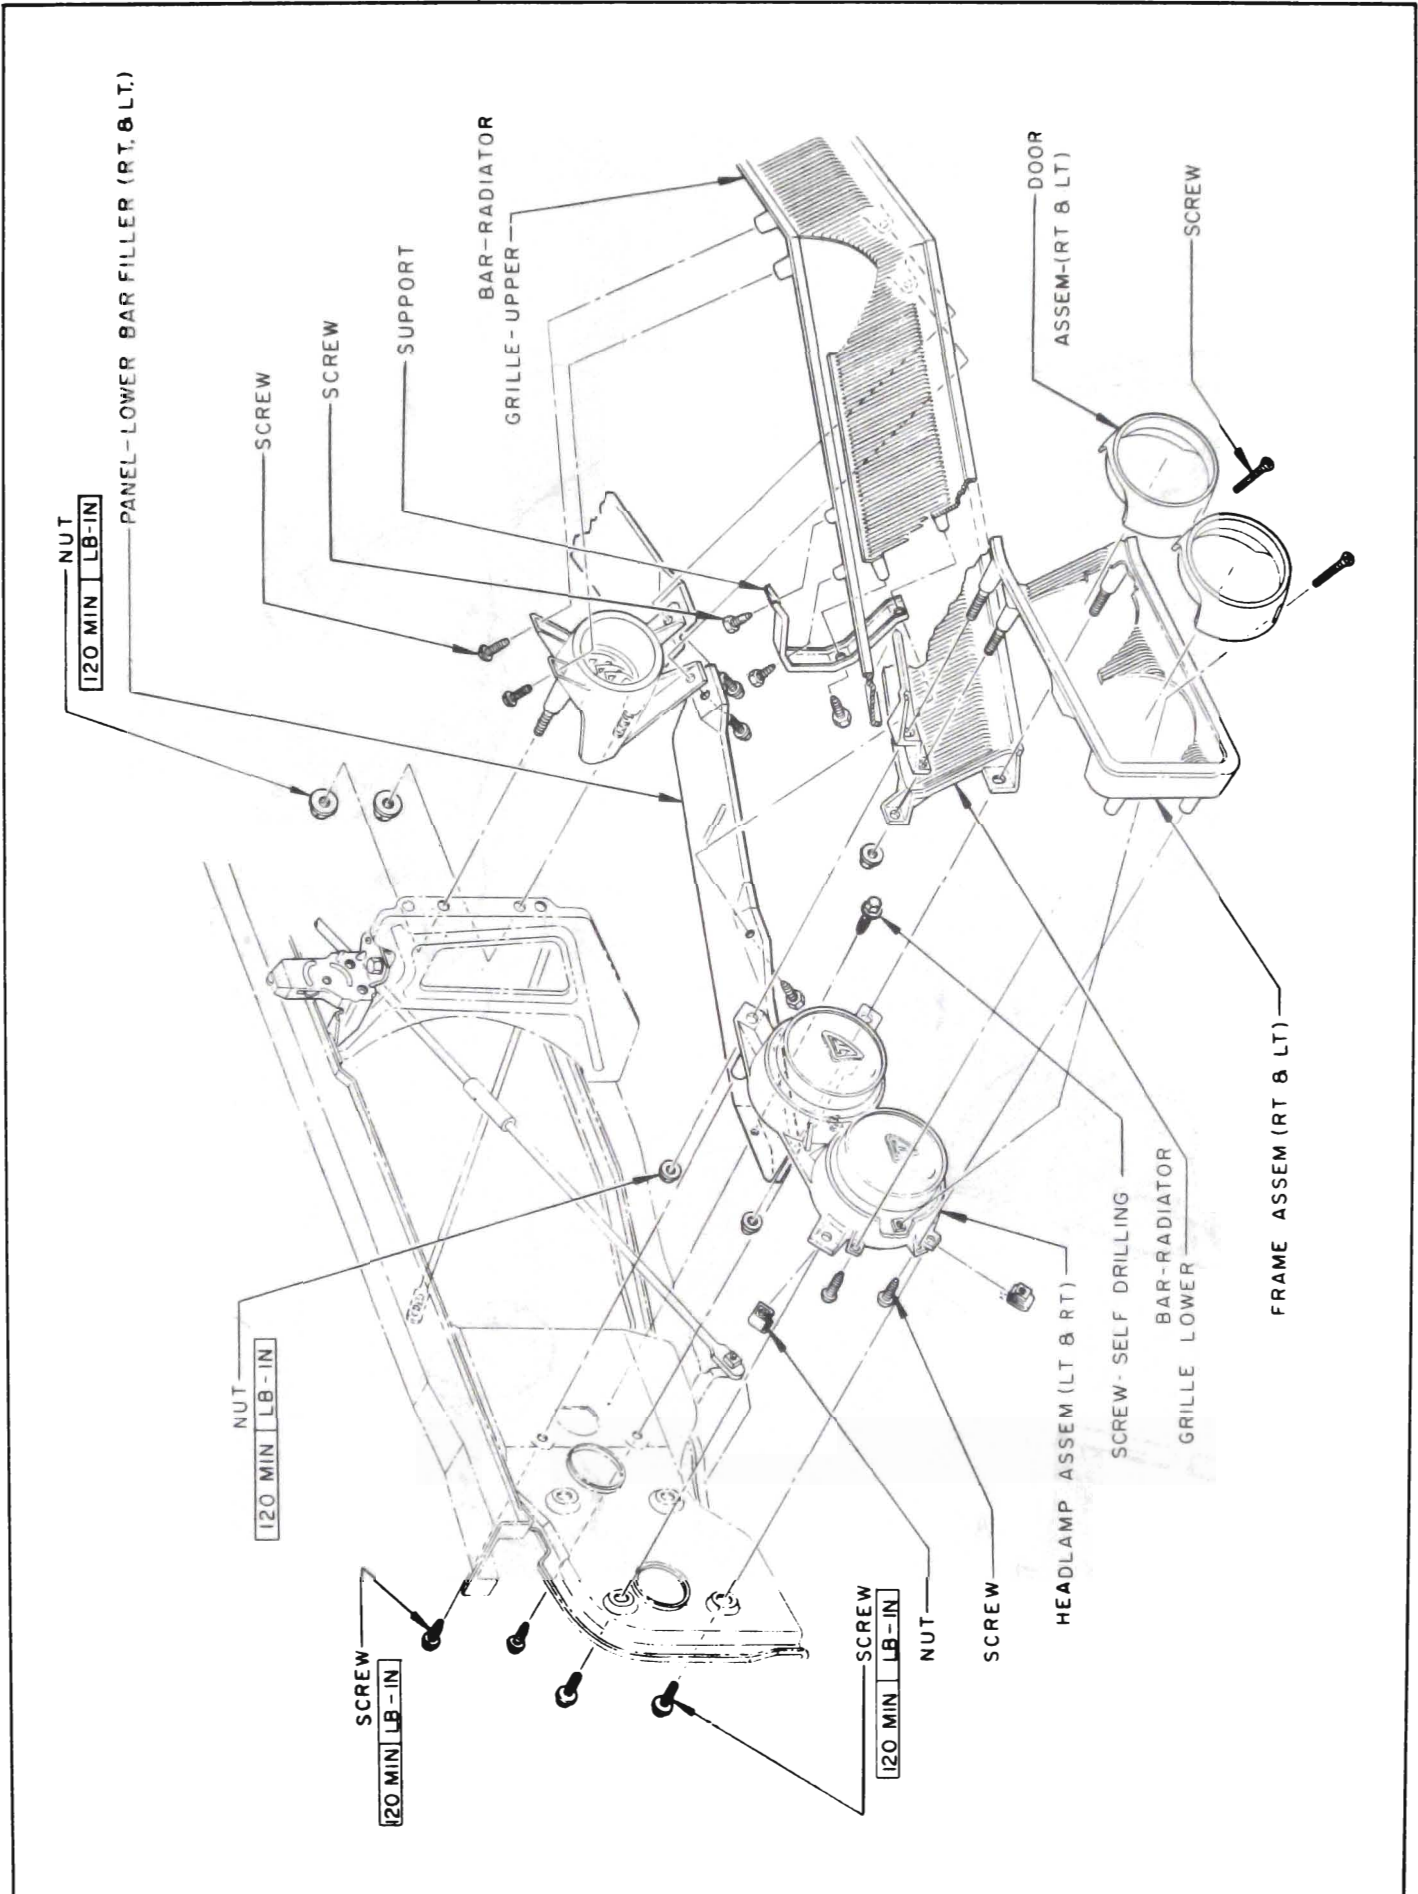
Radiator Grille, Headlamps, and Hood Latch Installation - 46 Series
